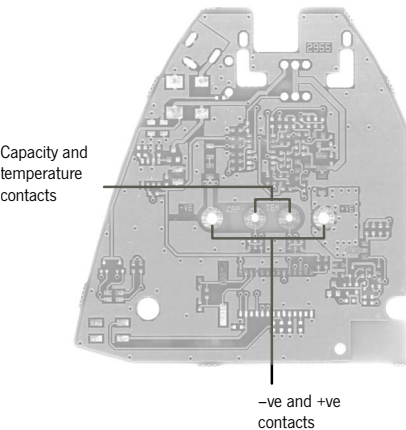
The fast charger PCB, showing the location of the different spring contacts
